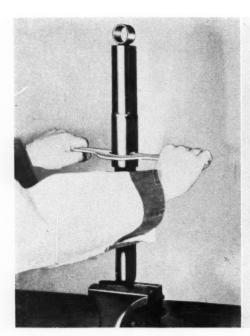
Removing piston rod guide retaining nut with spanner wrench inserted through the dust shield.
